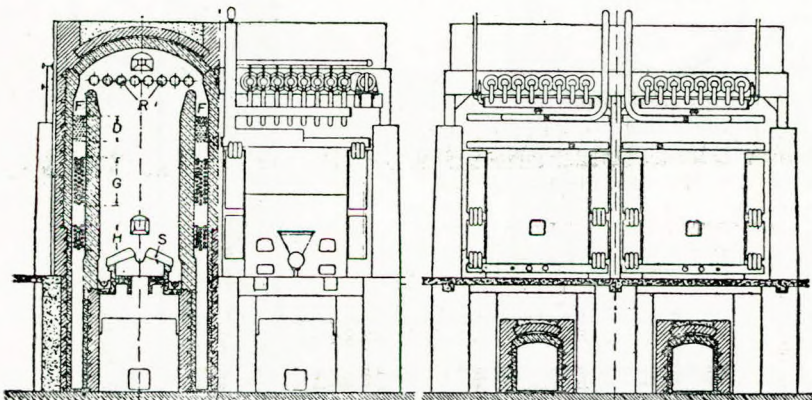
Longitudinal Section and Front Elevation of two "Atmos" Boilers.
